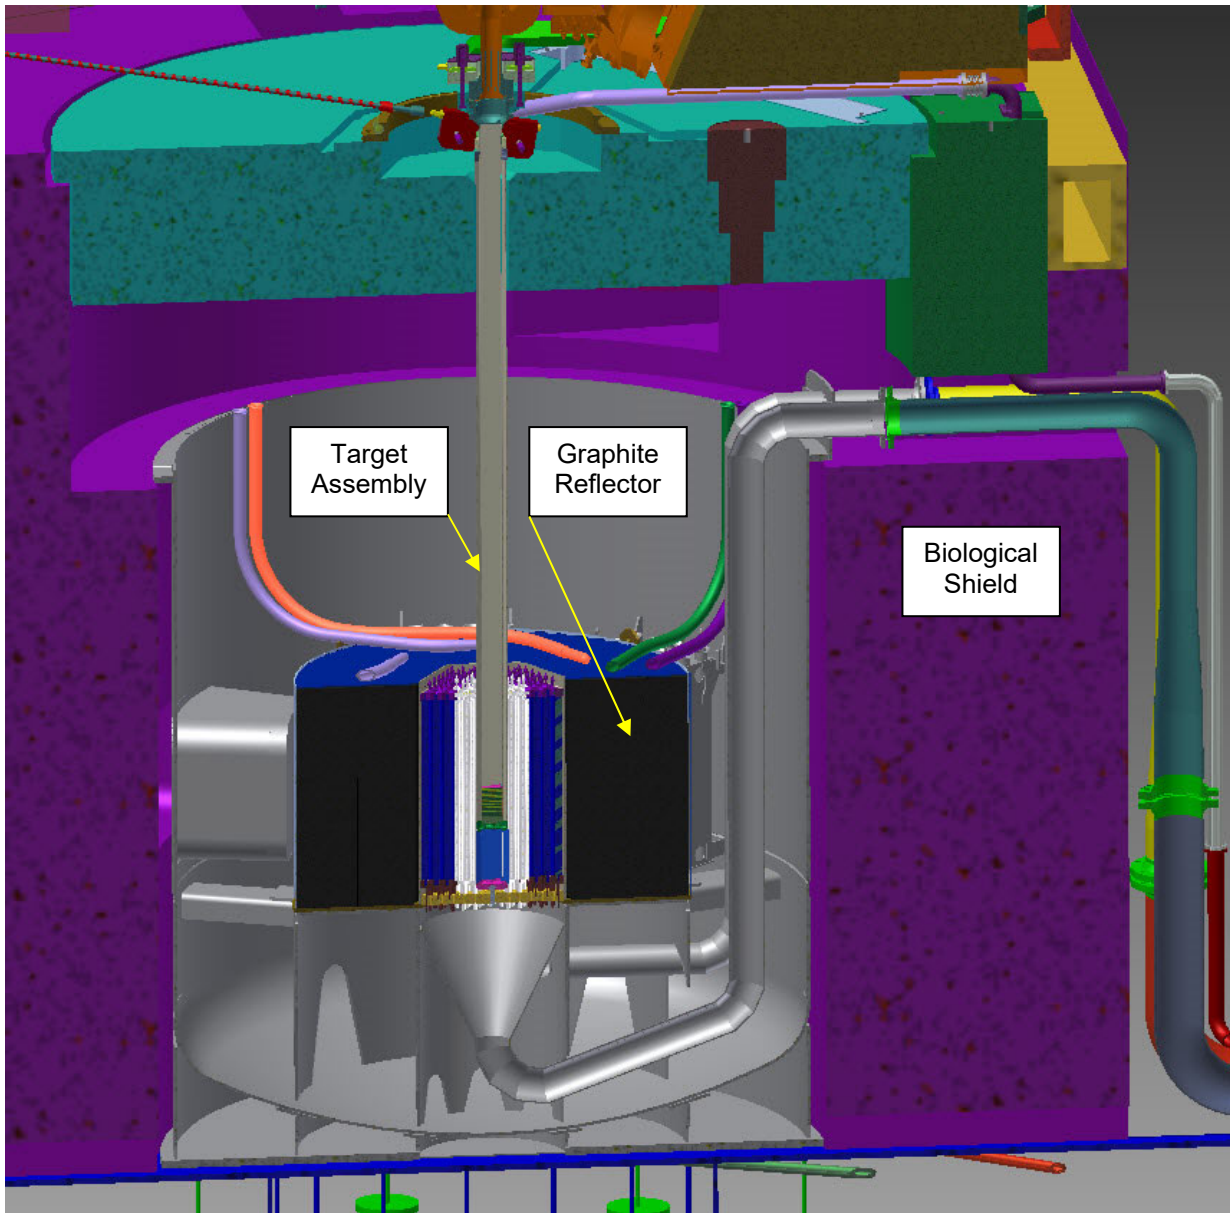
Section view through the subcritical assembly shows the target assembly in the center, graphite reflector, tank, and biological shielding; vacuum clamp and coolant clamp are visible at top.
